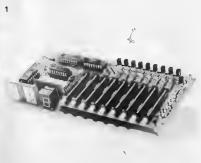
A section of p.c.b. is sawn out of the main board at the point where the display board, accommodeting the 7-segment display, is to be mounted.
